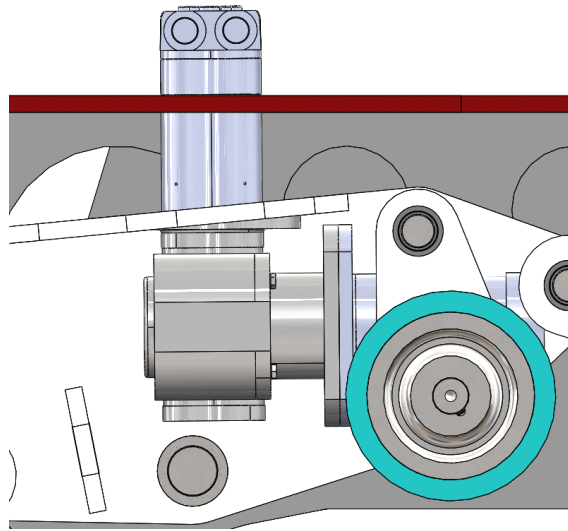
The hydraulic motor is attached to the axle which drives the wheel.
